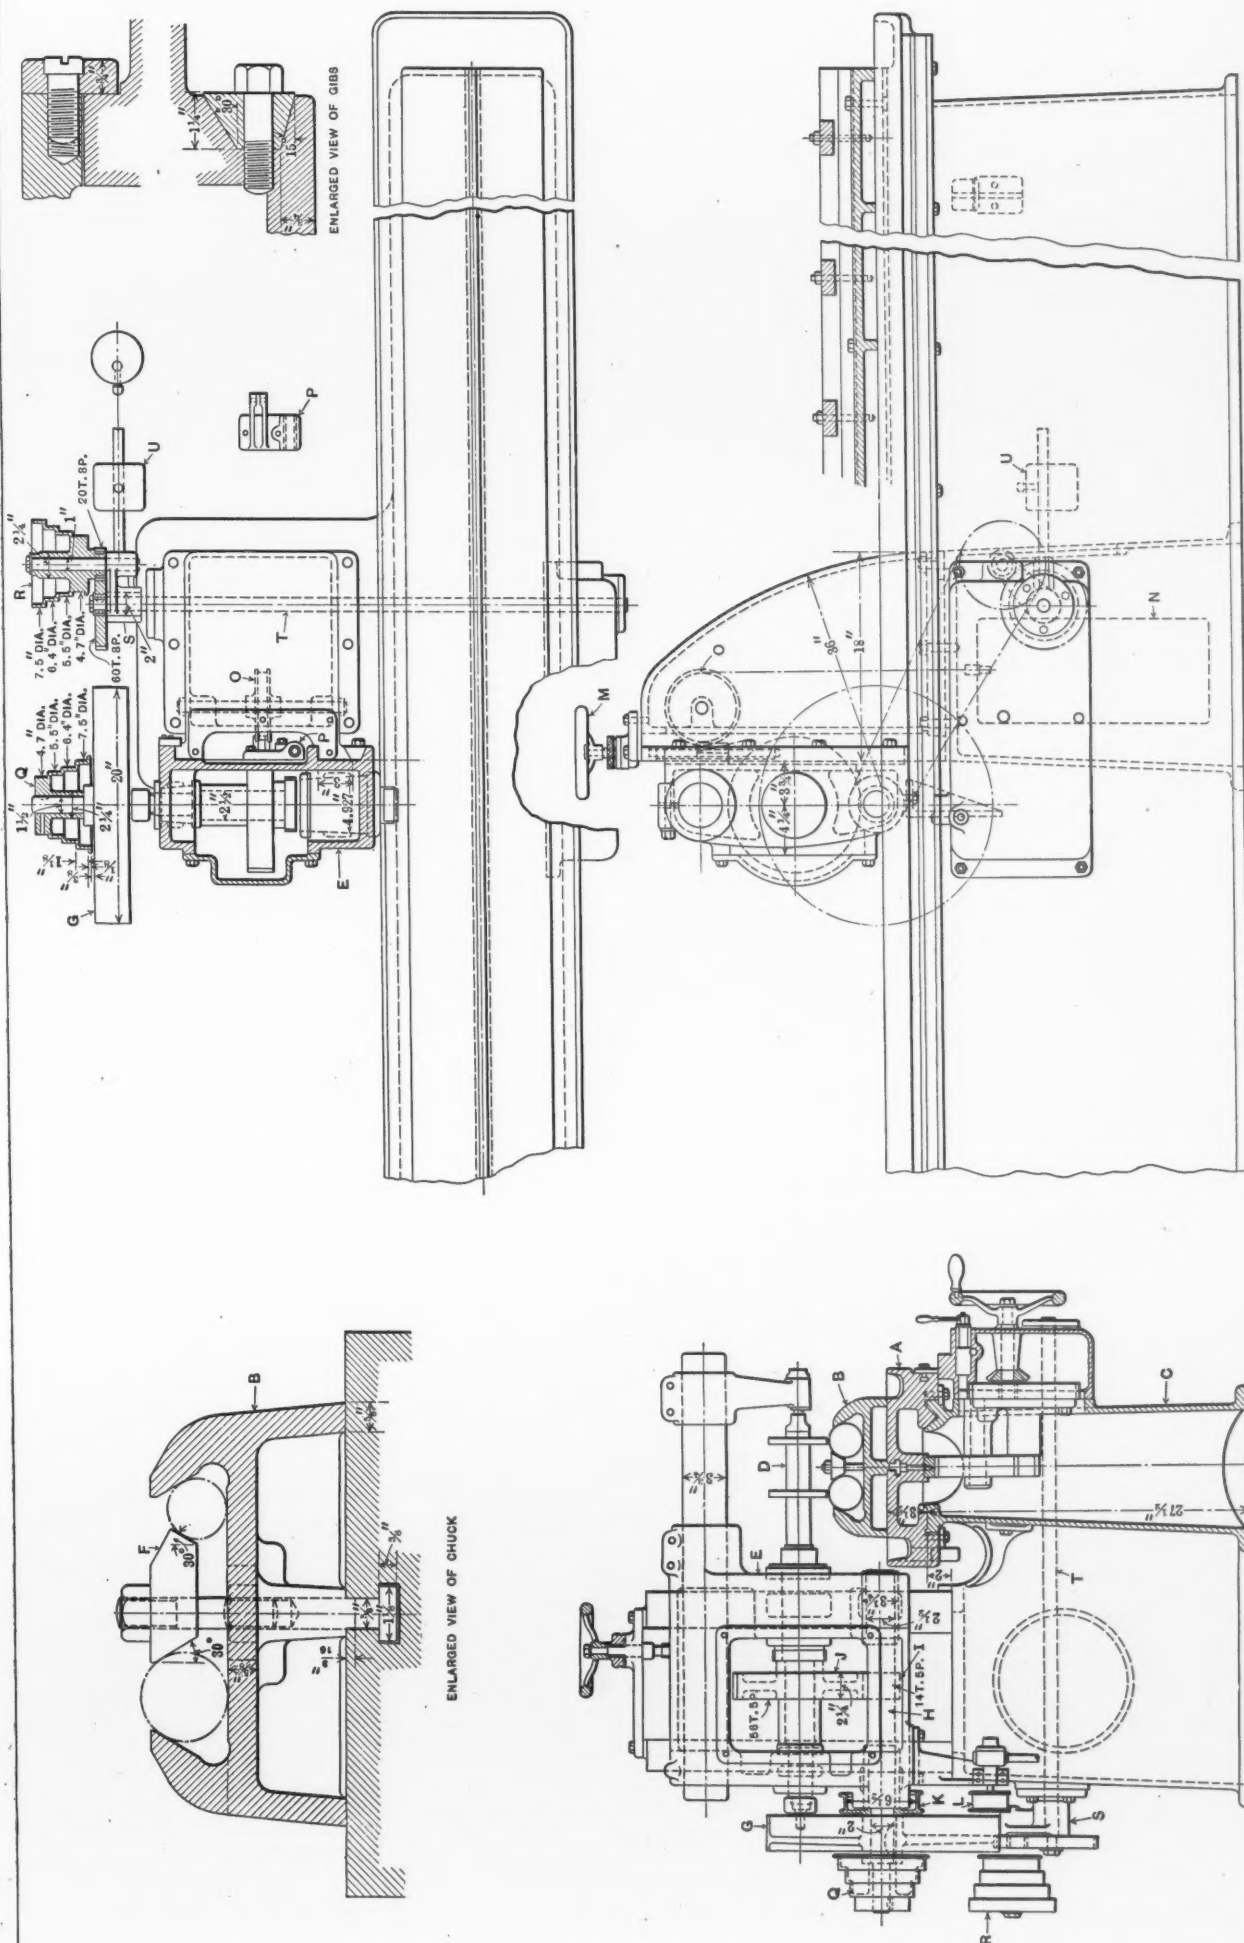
Construction and Important Details of Keyway Milling Machine shown in Figs. 2 and 3
